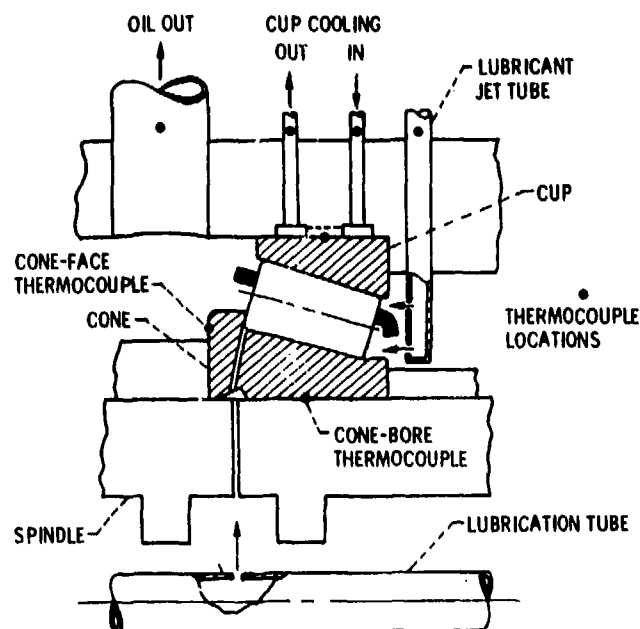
Tapered-roller bearing with cone-rib and jet lubrication. (From ref. 11.)
